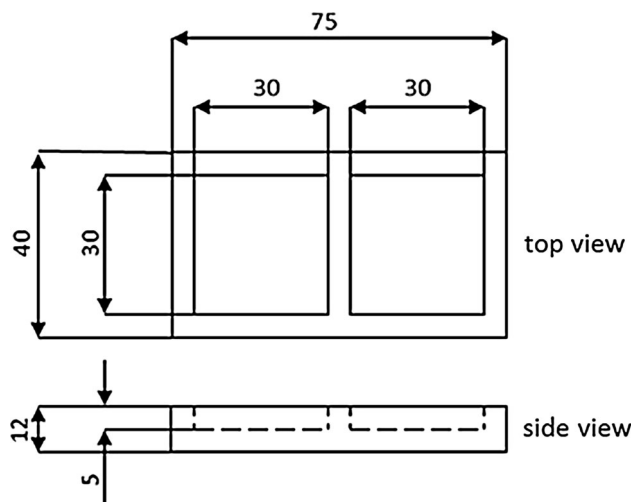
Schematic drawing of a model of expected integral element (mm).
